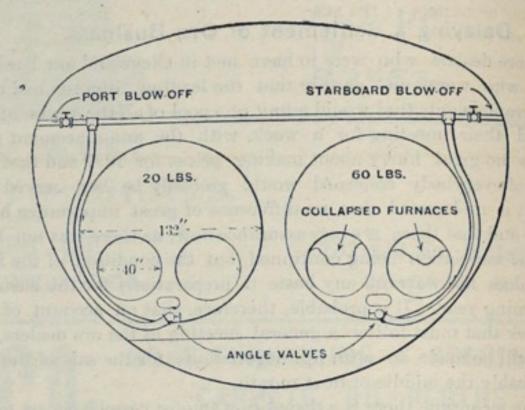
CROSS SECTION SHOWING ARRANGEMENT OF BLOW PIPES.
